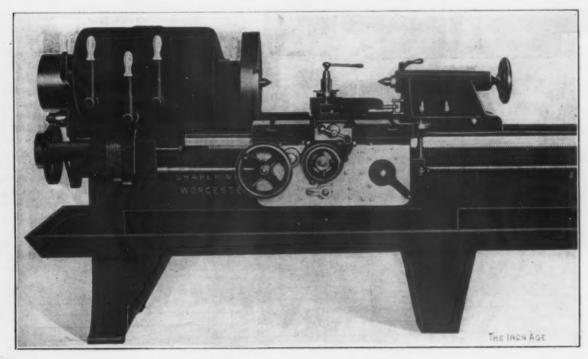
An 18-Inch Lathe with Patent Geared Head, Manufactured by the Draper Machine Tool Company, Worcester, Mass.
